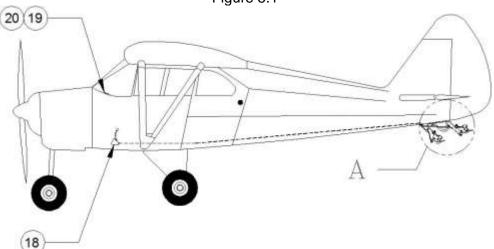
PATH Dual tow Hook Install for Piper PA-22 & Colt-108 (Piper PA-22 Shown)
